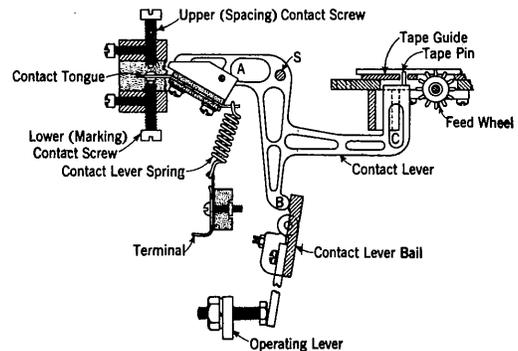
Contact Mechanism of Transmitter-Distributor
